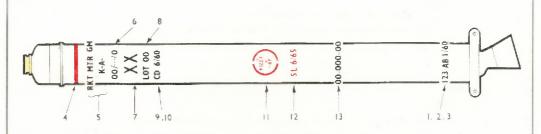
DRILL/SERVICING (BOOST) ROCKET MOTOR
